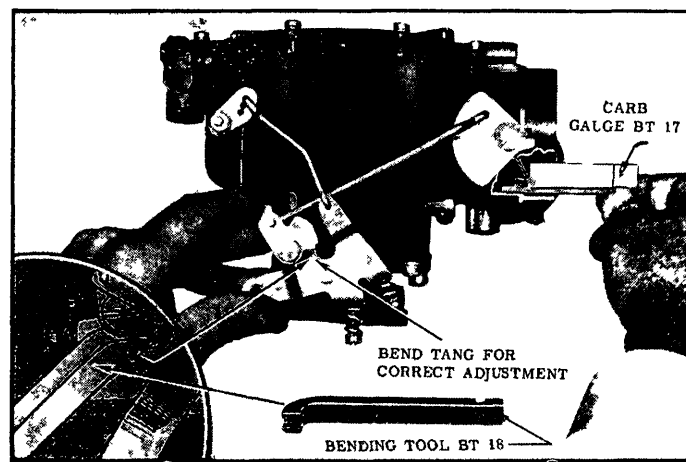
D Unloader adjustment on Rochester Oldsmobile 1949-50 carburetor
